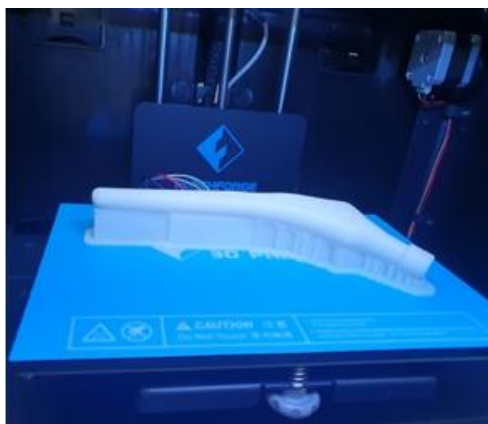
Finished prototype inside CREATOR PRO Flash Forge with the final generated raft support
